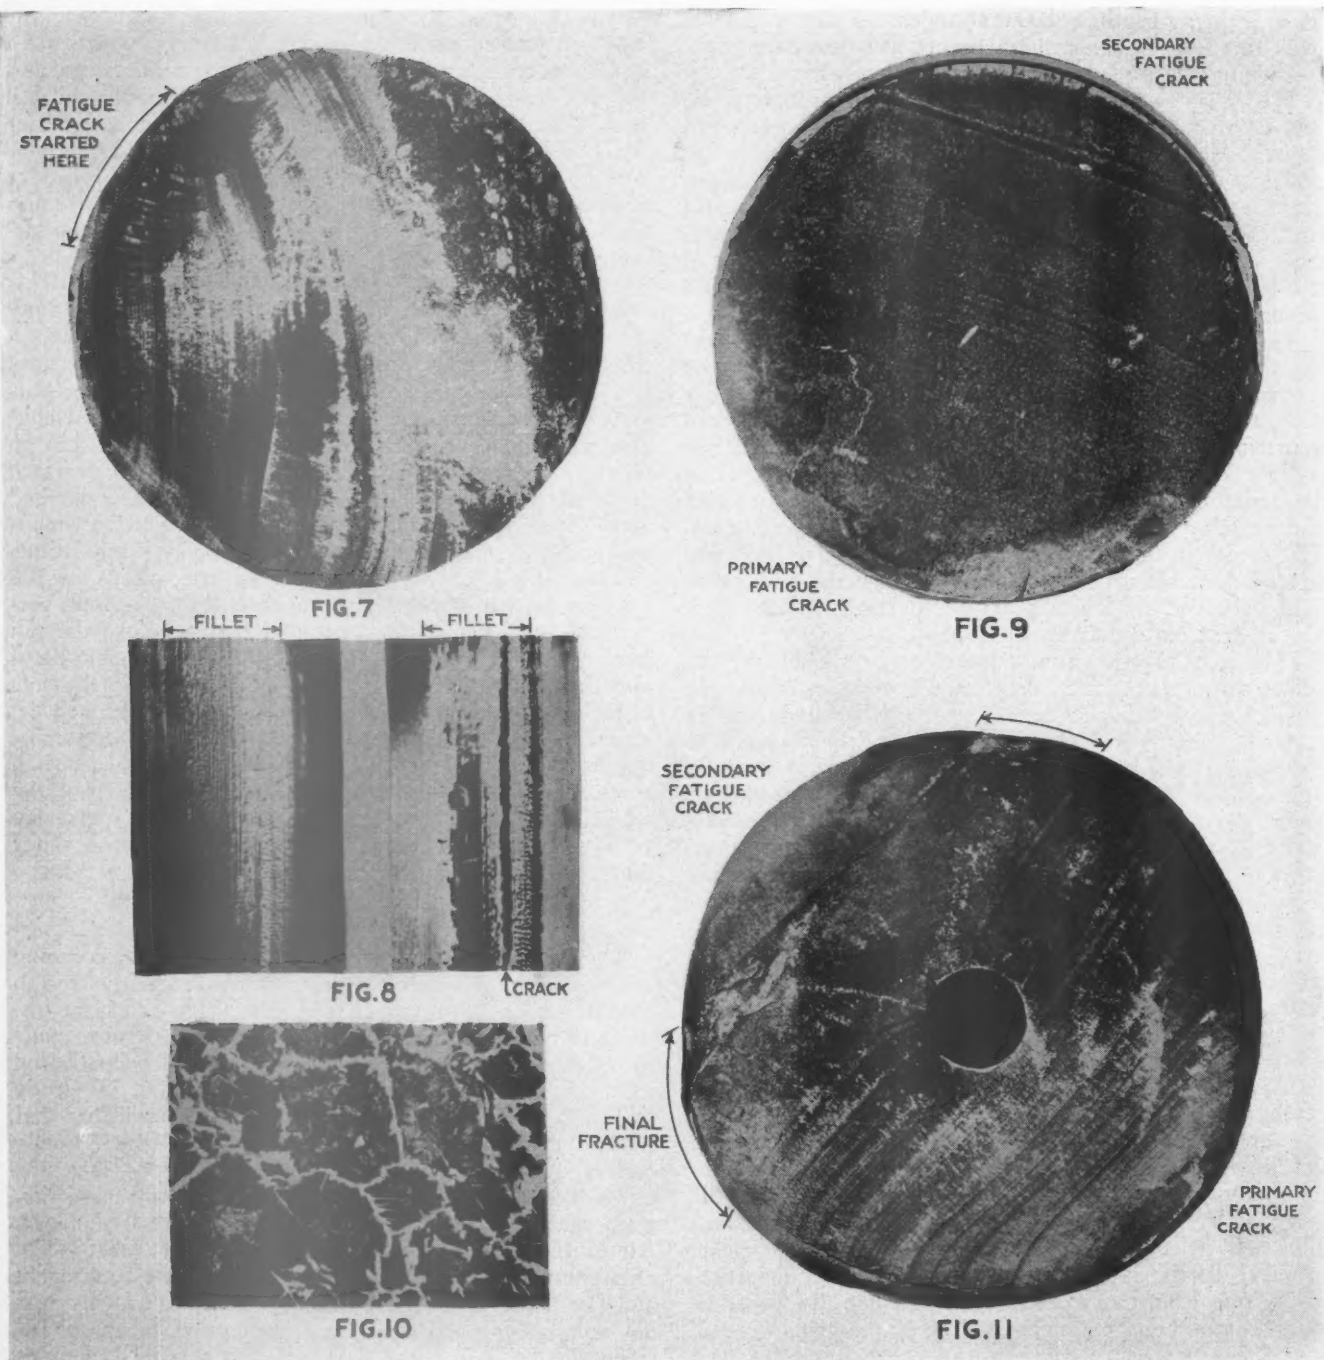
Broken surface of a solid crank pin. The material was apparently somewhat inferior, but poor machine finish, as shown in Fig. 8, was probably the primary cause of failure. Fig. 8—Micro-photograph showing crack and rough machining in the fillet of the crank pin, the broken surface of which is shown in Fig. 7. Fig. 9—Surface of break in this crank pin indicates rapid progress of fatigue crack. Fig. 10—Microscopic view showing coarse structure of material in crank pin, the break in which was illustrated in Fig. 9. Fig. 11—
